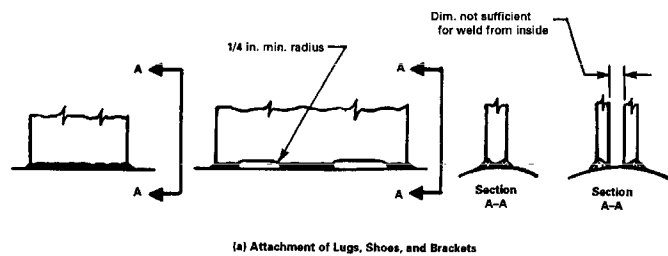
TYPES OF ATTACHMENT WELDS
